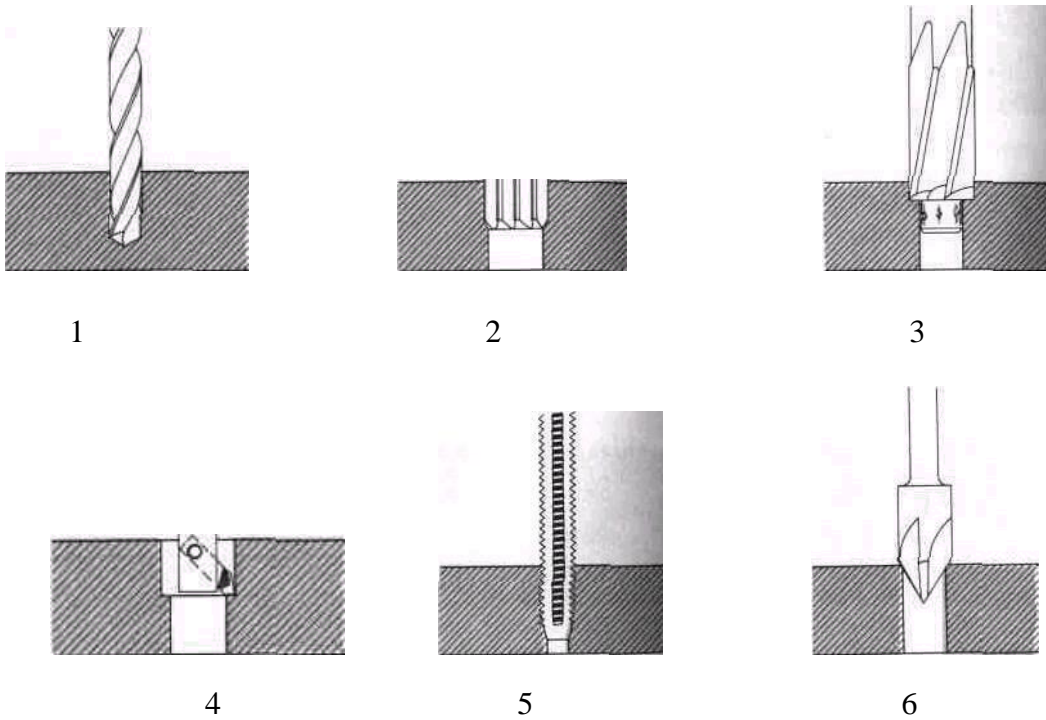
Cutting tools that can be used on a drill press and a lathe.
